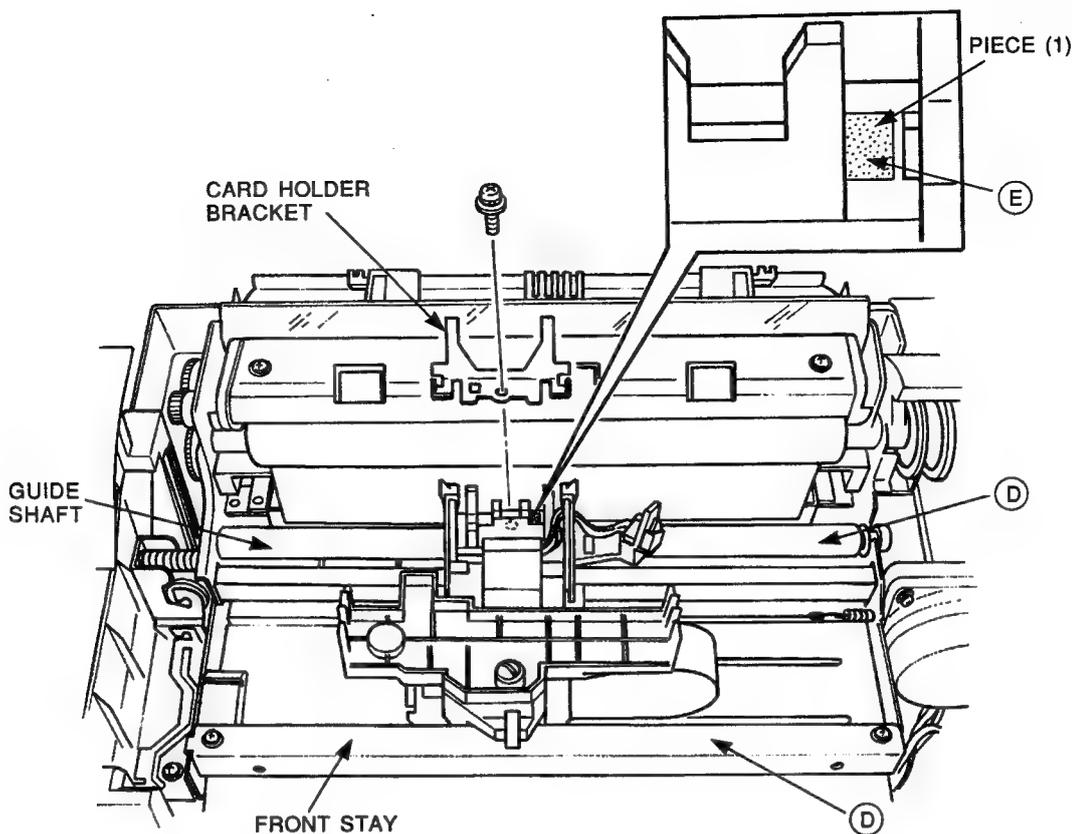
Guide Shaft, Front Stay and Piece (1)
